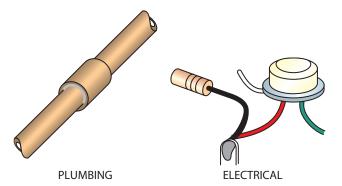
Examples of brazing and braze welded joints.
